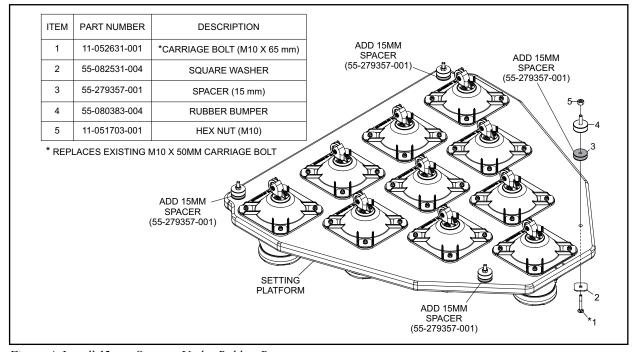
Install 15 mm Spacers Under Rubber Bumpers
